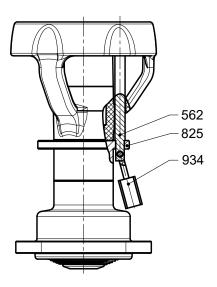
Upper section of the diaphragm valve with handwheel locking device MD 40-MD 115
